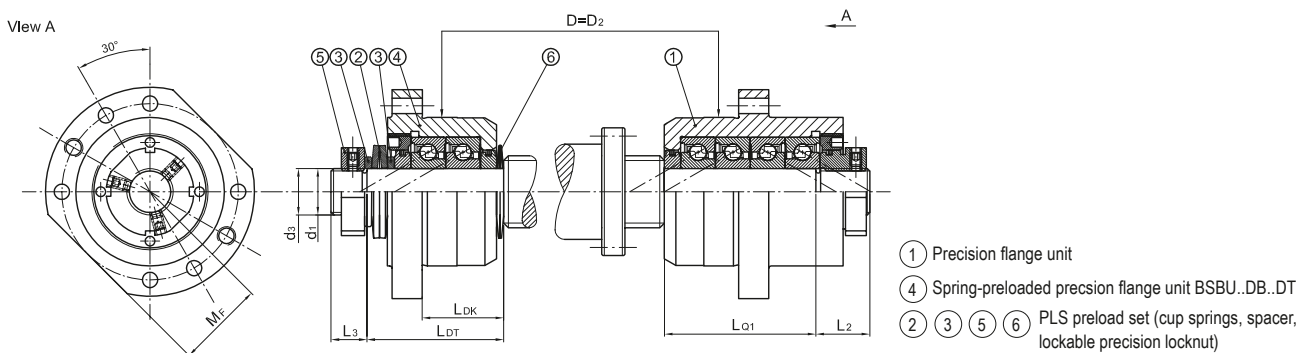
Ball screw held in bearings on both sides with BSBU-M...Q + BSBU...DB...DT + PLS, with a floating bearing seat that can be pretensioned and preloaded via lockable nuts
